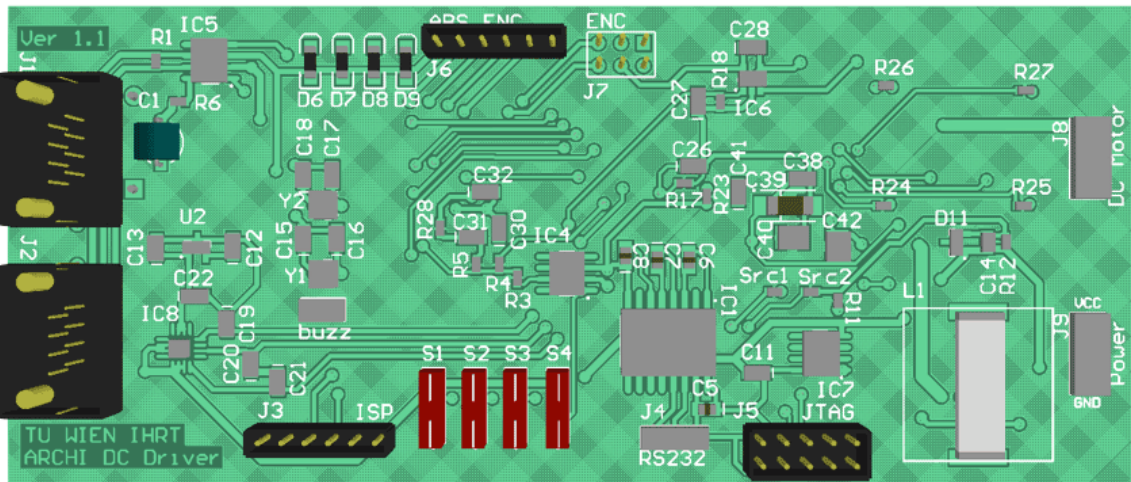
Front 3-D view of the brushed motor driver, with incomplete 3D bodies
